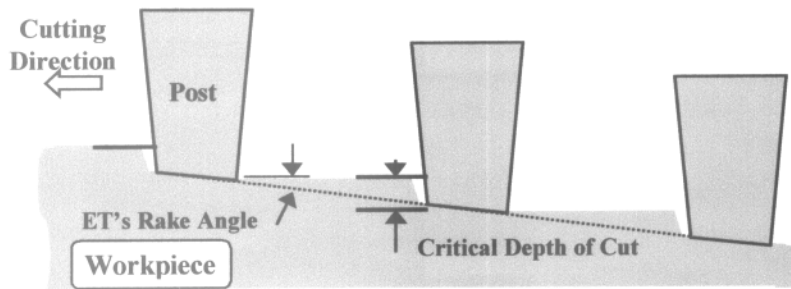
Schematic drawing of the cutting mechanism using the new Engineered Tool machining
